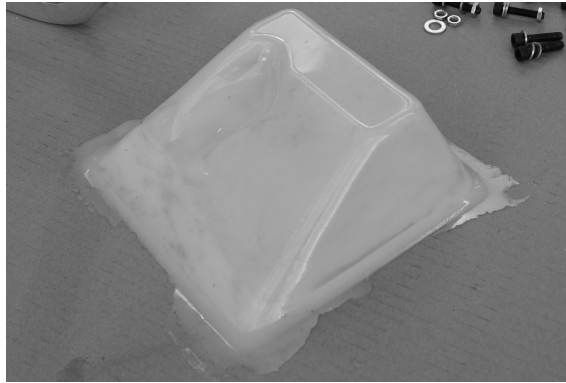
Rotocasting part manufactured with the unfinished SPIF mould as demoulded
